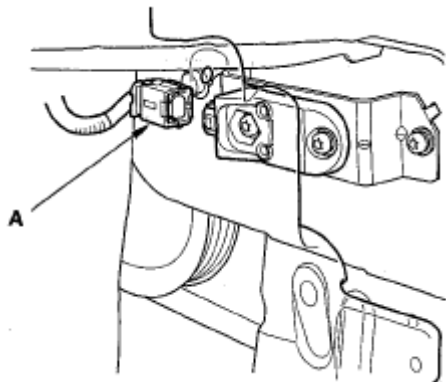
Identifying Engine Compartment Wire Harness 2P Connector
